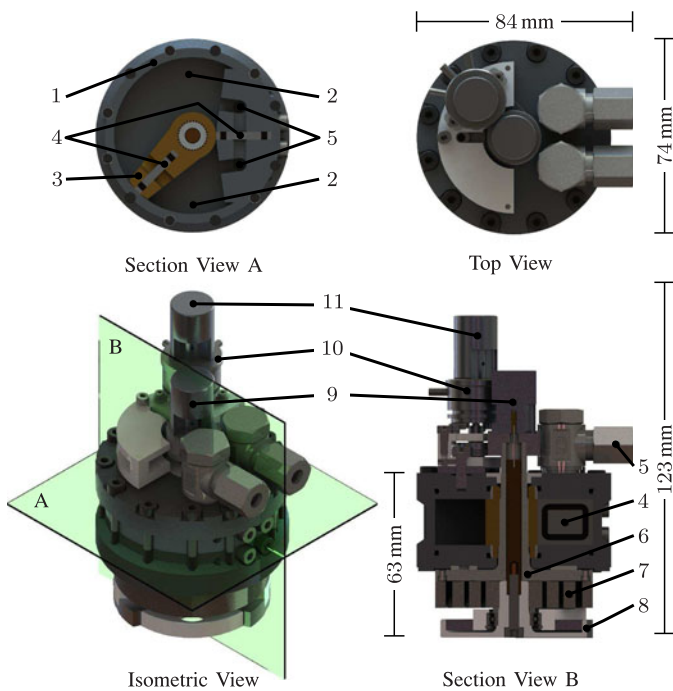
Isometric and top view of the hydraulic motor as well as a horizontal (A) and vertical (B) section view. The hydraulic motor is built up with a cylinder (1) which contains two chambers (2) created by the vane (3) and the window seals (4). Oil pressure in the chambers can be regulated by an oil flow through the in- and outlet ports (5). The motor shaft (6) is connected to the elastic element (7) where the latter is connected to the joint flange (8). The deflection of the elastic element is measured using an encoder (9). The motor angle is measured using a potentiometer (10) and encoder (11) in combination with a high precision pulley drive.
